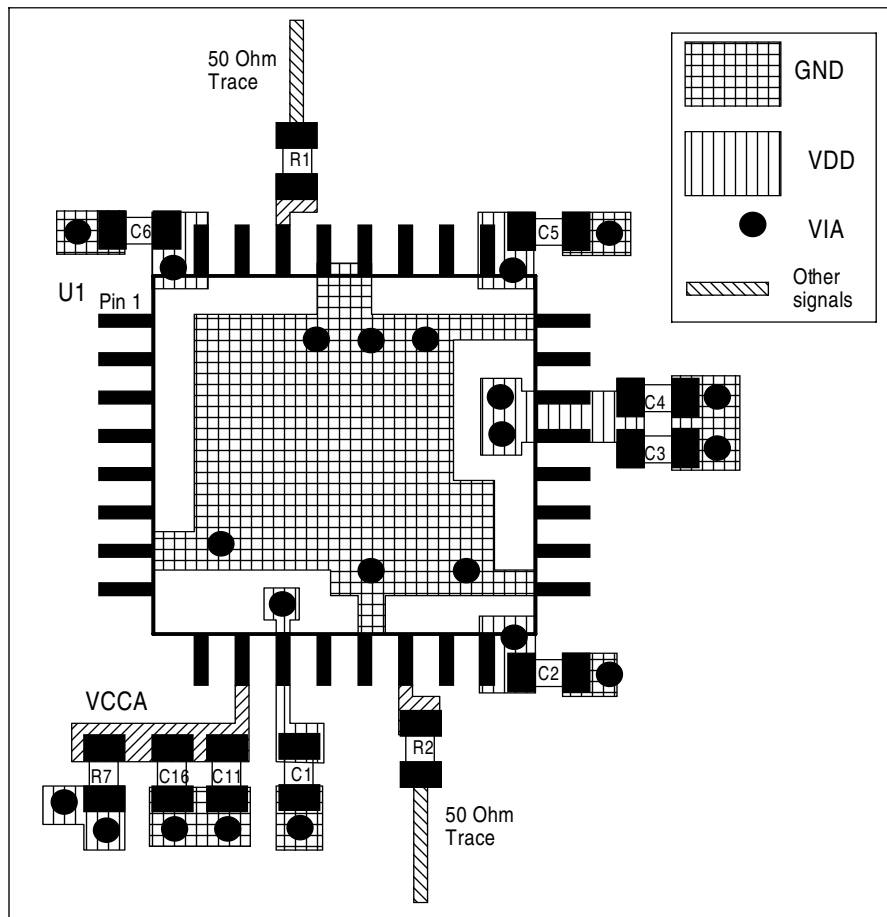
B. PCB BOARD LAYOUT FOR ICS87952I-147
